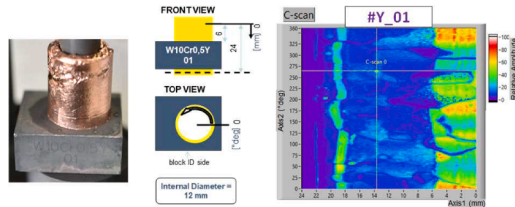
Block #Y_01 after OFHC-Cu casting and UT C-scan in the Cu interlayer with bore hole machined to 12 mm.
